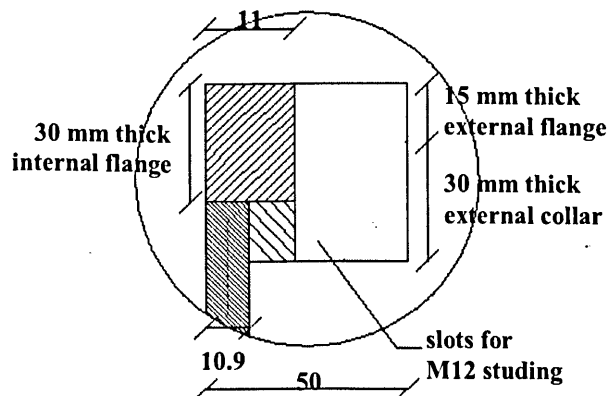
Elevation view for clamping bolt type 2 (B) from Section AA (all dimensions in mm, not to scale)
